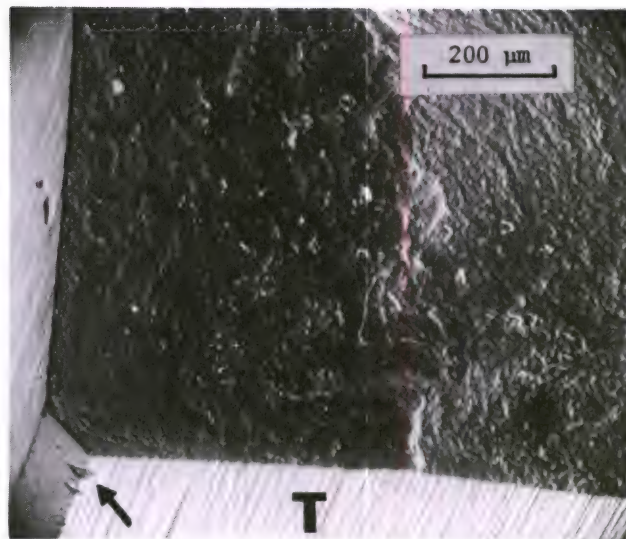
Fracture surface of a room temperature control fracture showing the mirror and corner chipping. Bend strength was 543 MPa.
